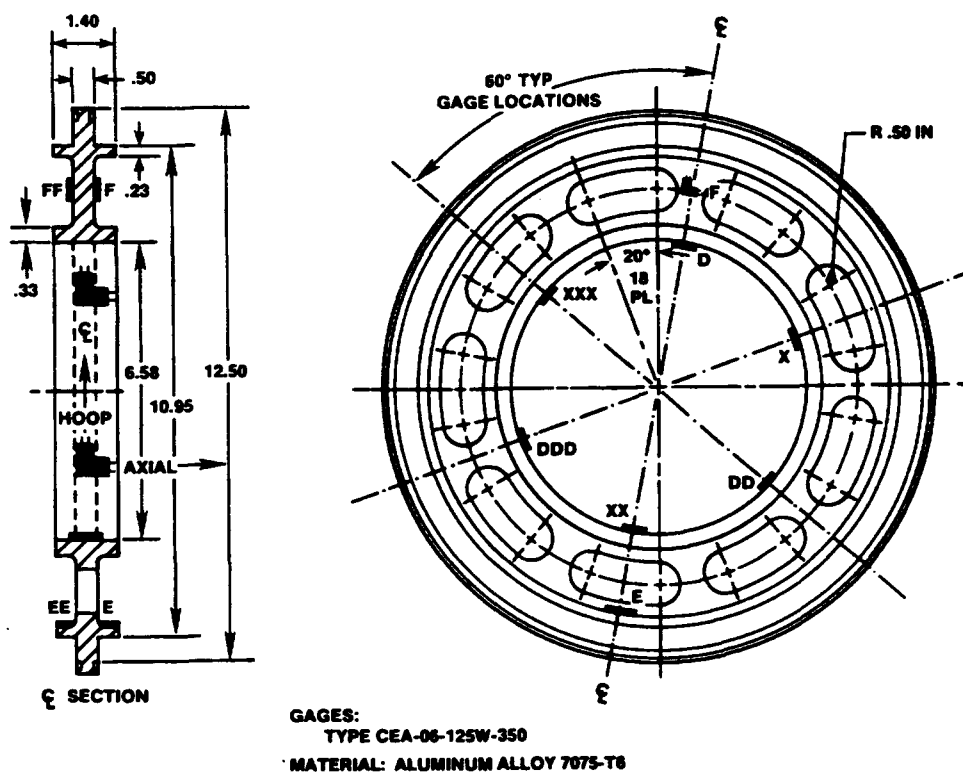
Aluminum ring stiffener DWG 0121605; location of gages.
